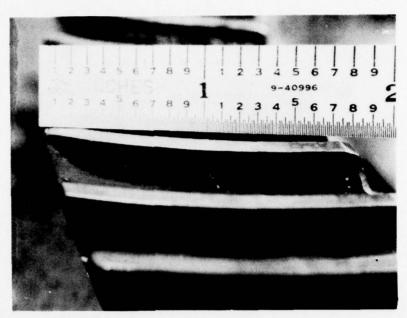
Main input gear teeth (drive side) showing light scoring after 54-minute loss-of-lube test of optimized transmission configuration number 2.
